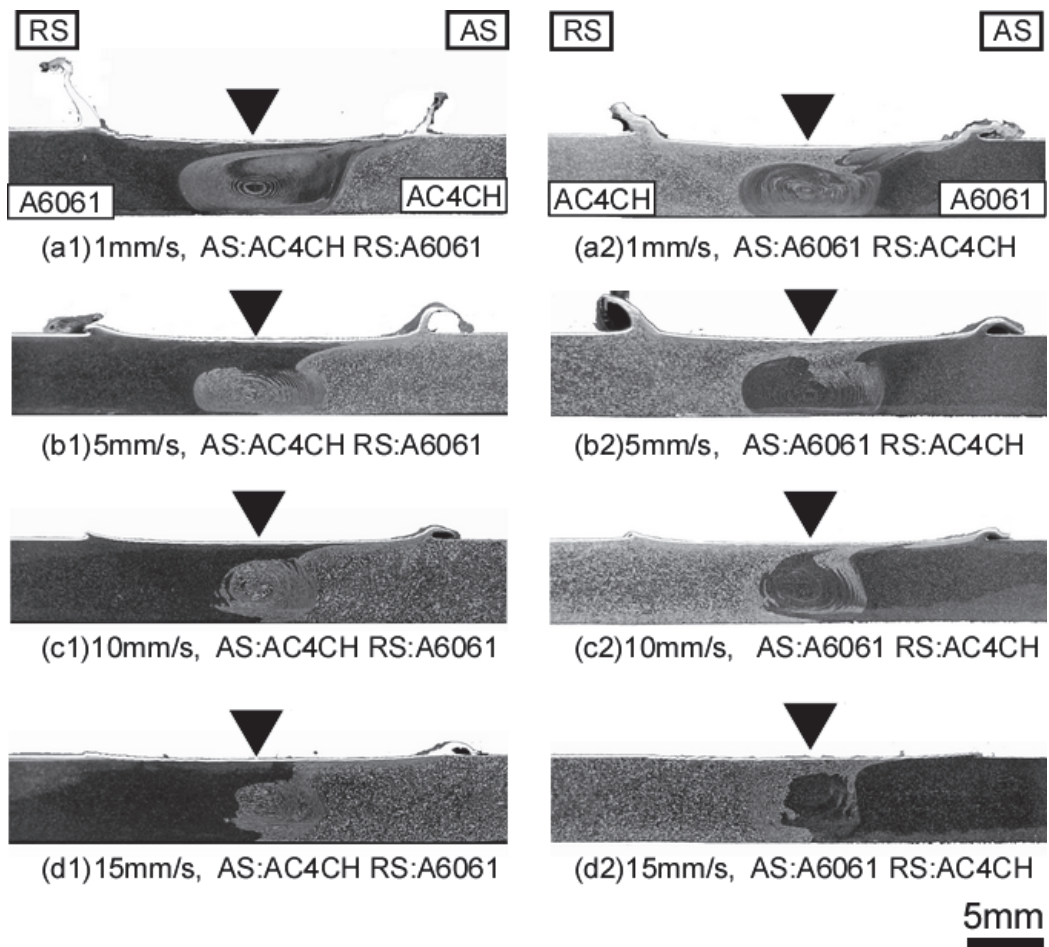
Cross-sectional macrostructures of FSW joints welded under various conditions. The triangles indicate the positions of the welding interfaces.
